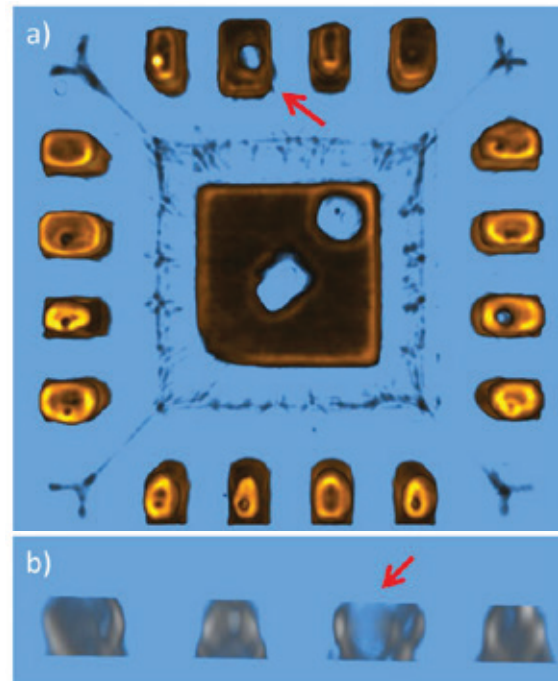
PCT 3D model of a QFN device. Extremely large void is shown going through the whole solder joint - suspected in overview (a) and confirmed in section view (b).
